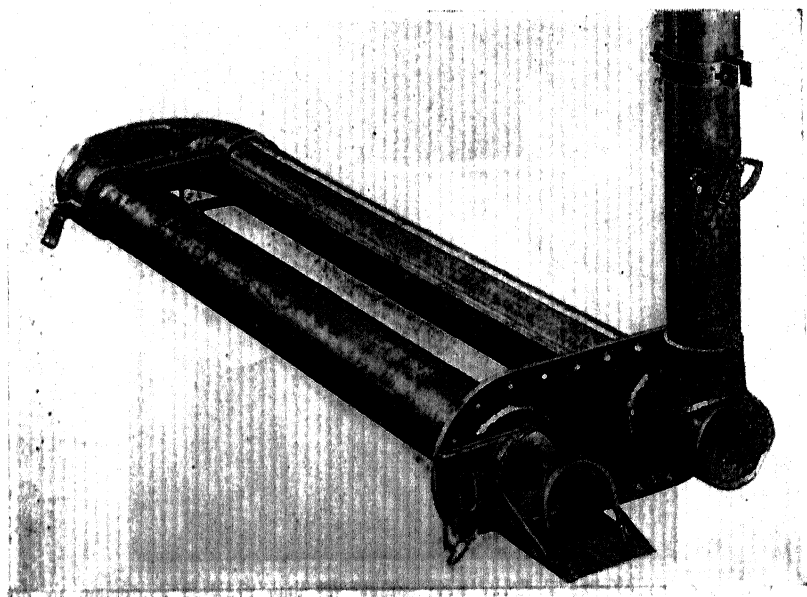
Arc welded steel heater flue for road tar truck.
